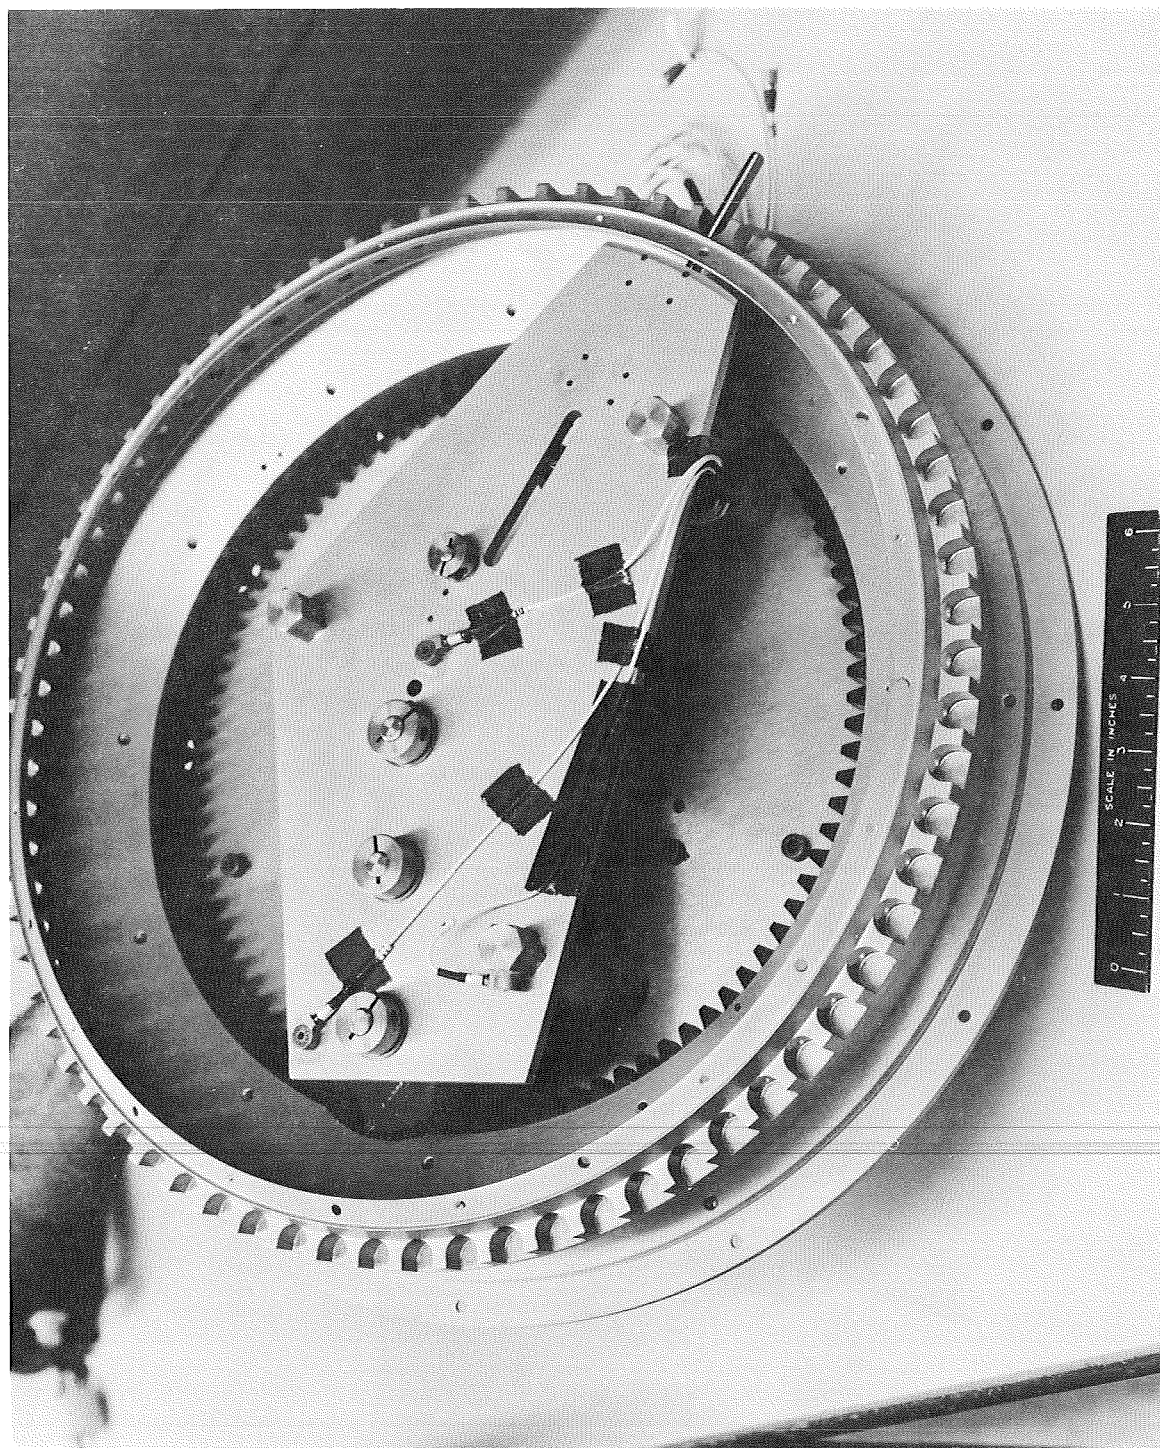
Accelerometers Mounted to Feeder Bearing Plate
